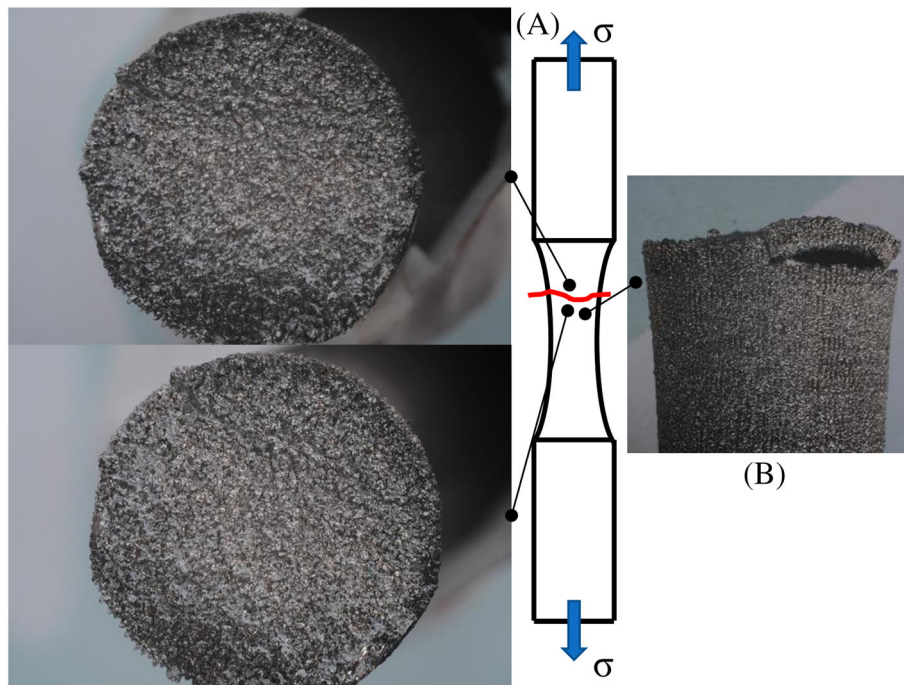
Fracture surfaces of the specimen Z2: (A) upper and lower faces; (B) layer debonding respect the loading direction
